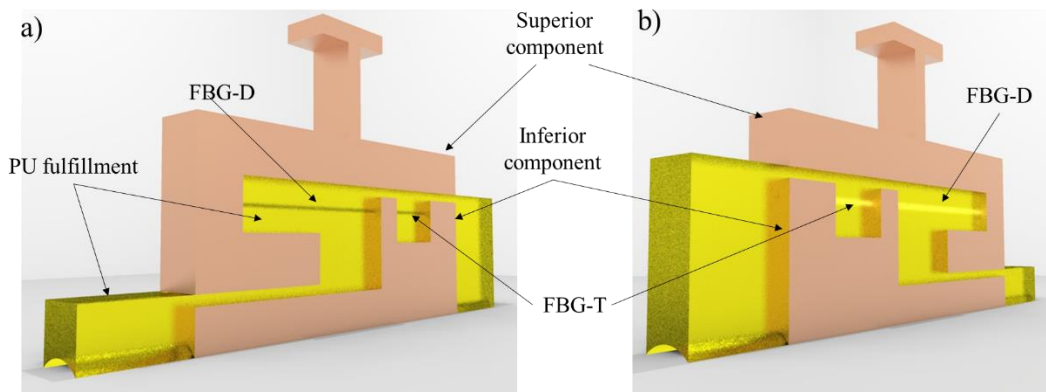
Details of the sensor FBG01: (a) front and (b) bottom views.
